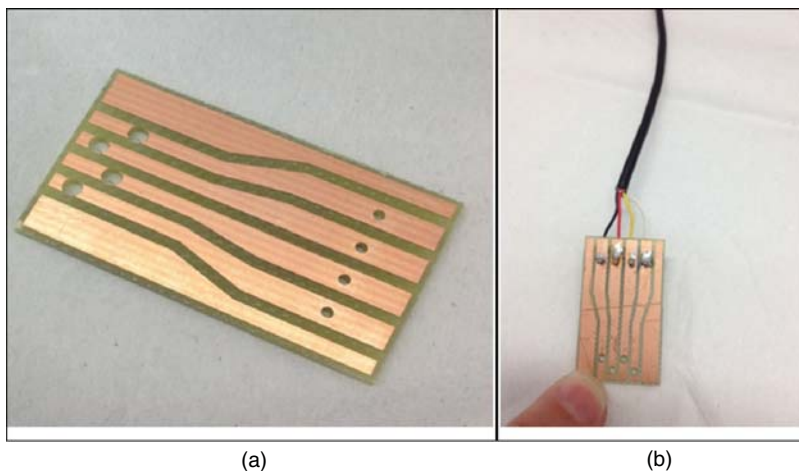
(a) Circuit board used for making electrical contact to IDA chip. (b) Circuit board with electrical wires soldered in place. (*See insert for color representation of this figure.*)
